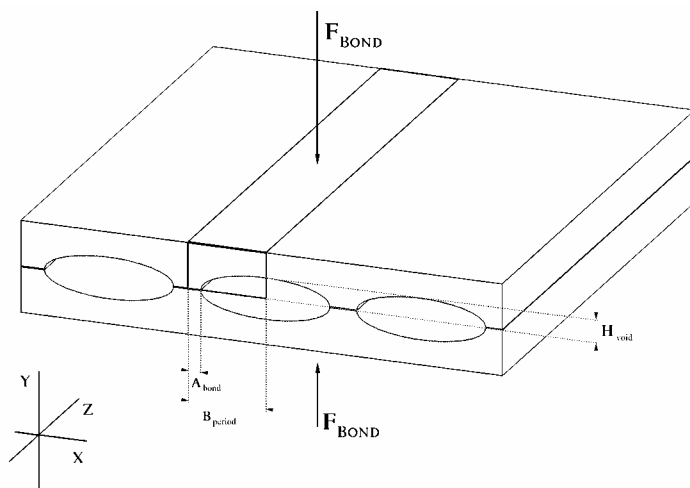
Principle sketch of a dry milled weld surface
